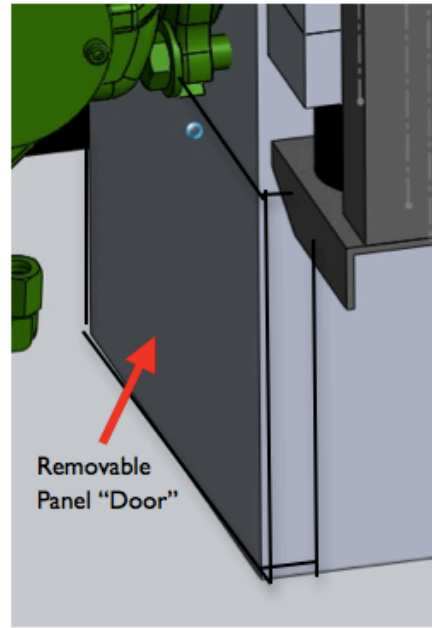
Location of Removable Panel "Door" for Lower Sprocket and Hub
